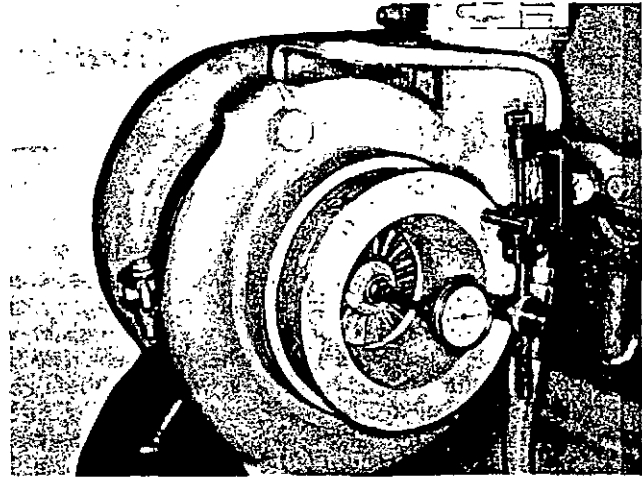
, N11956. Checking T-50 Turbocharger bearing clearance
